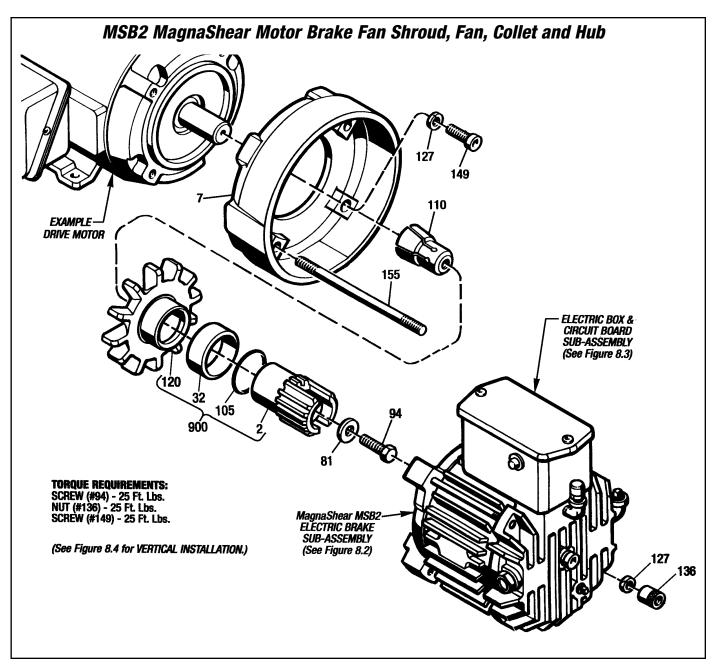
MSB2 MagnaShear Motor Brake - Fan Shroud, Fan, Collet and Hub
